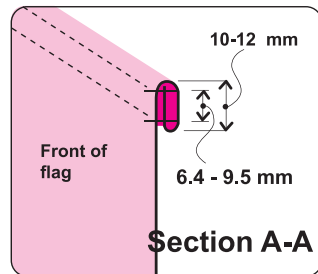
Outdoor Flag - One-piece Printed Flag - Construction Details
